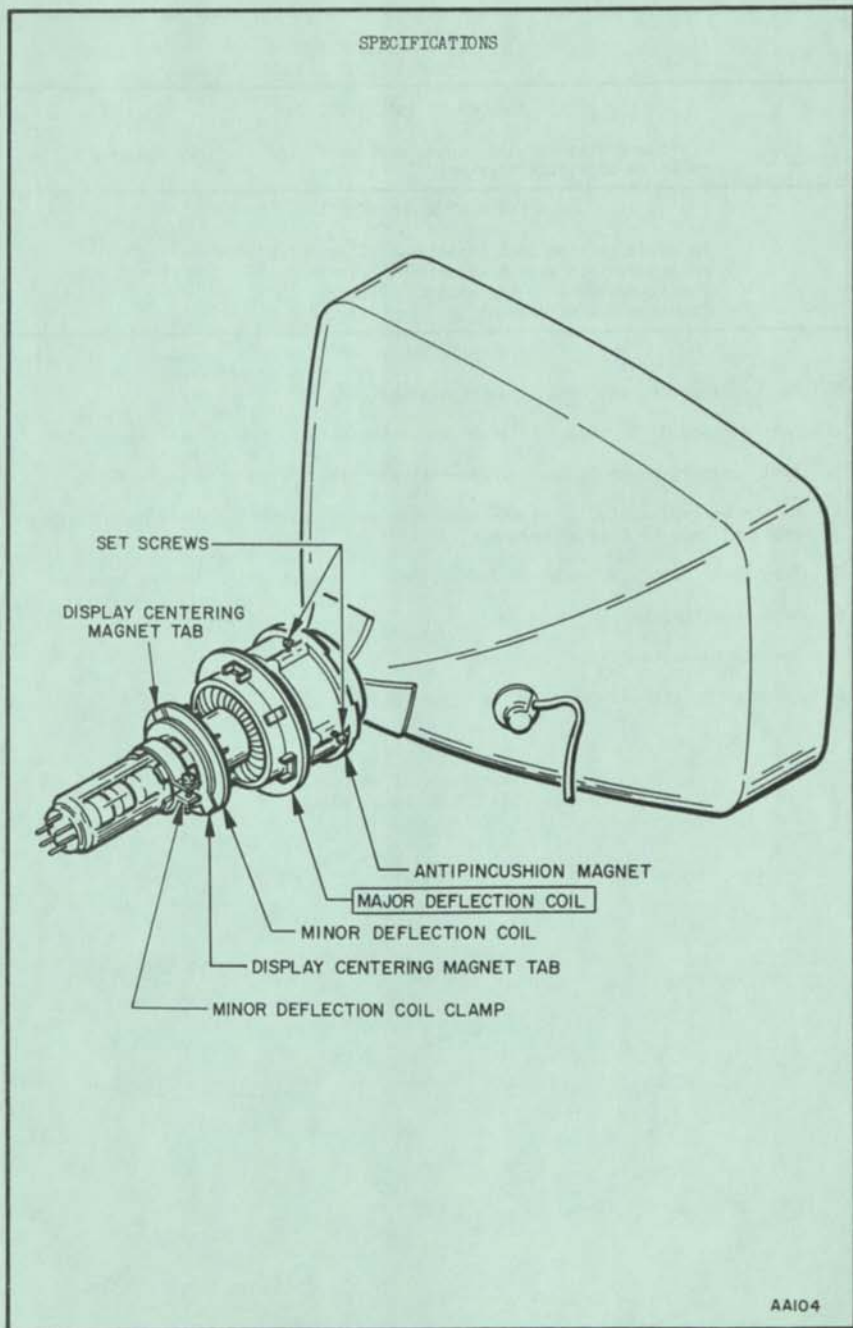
Major Deflection Coil Adjustment (Sheet 2)
